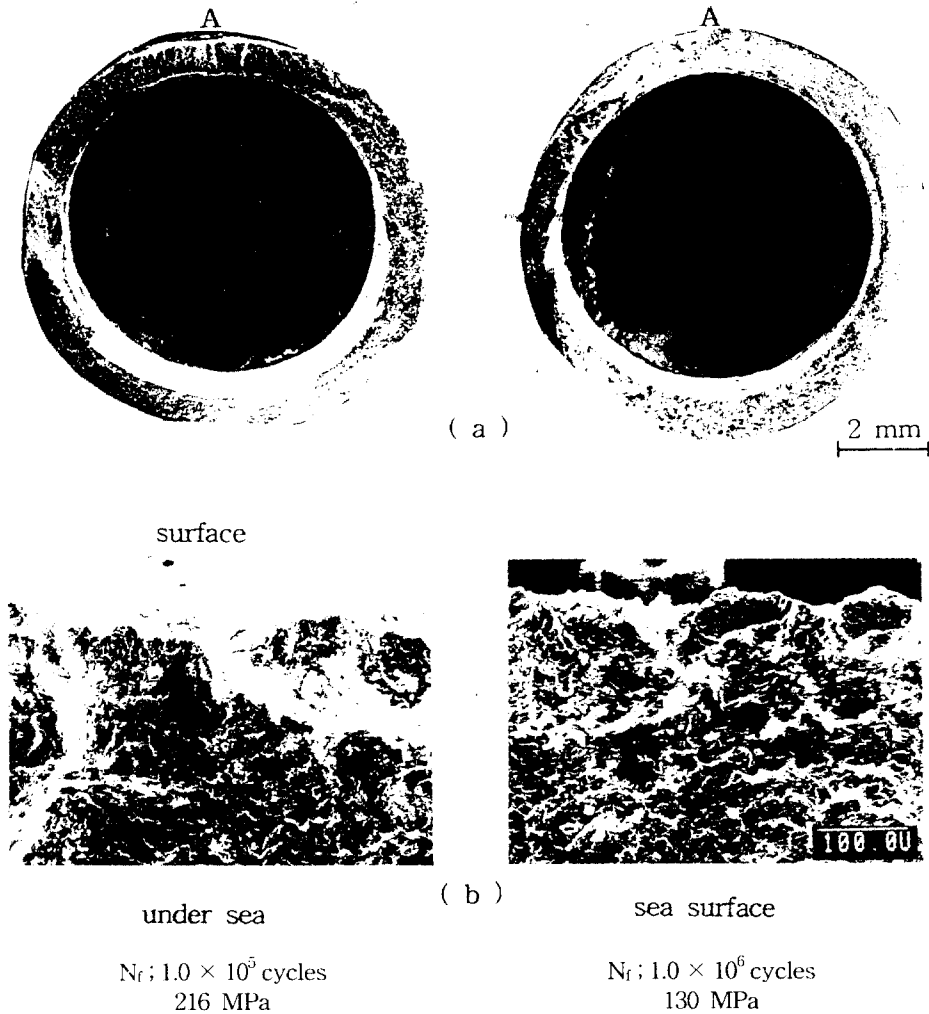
Fractography of hollow shaft specimen of 1mm thickness corroded with 3% NaCl solution during 100 days
